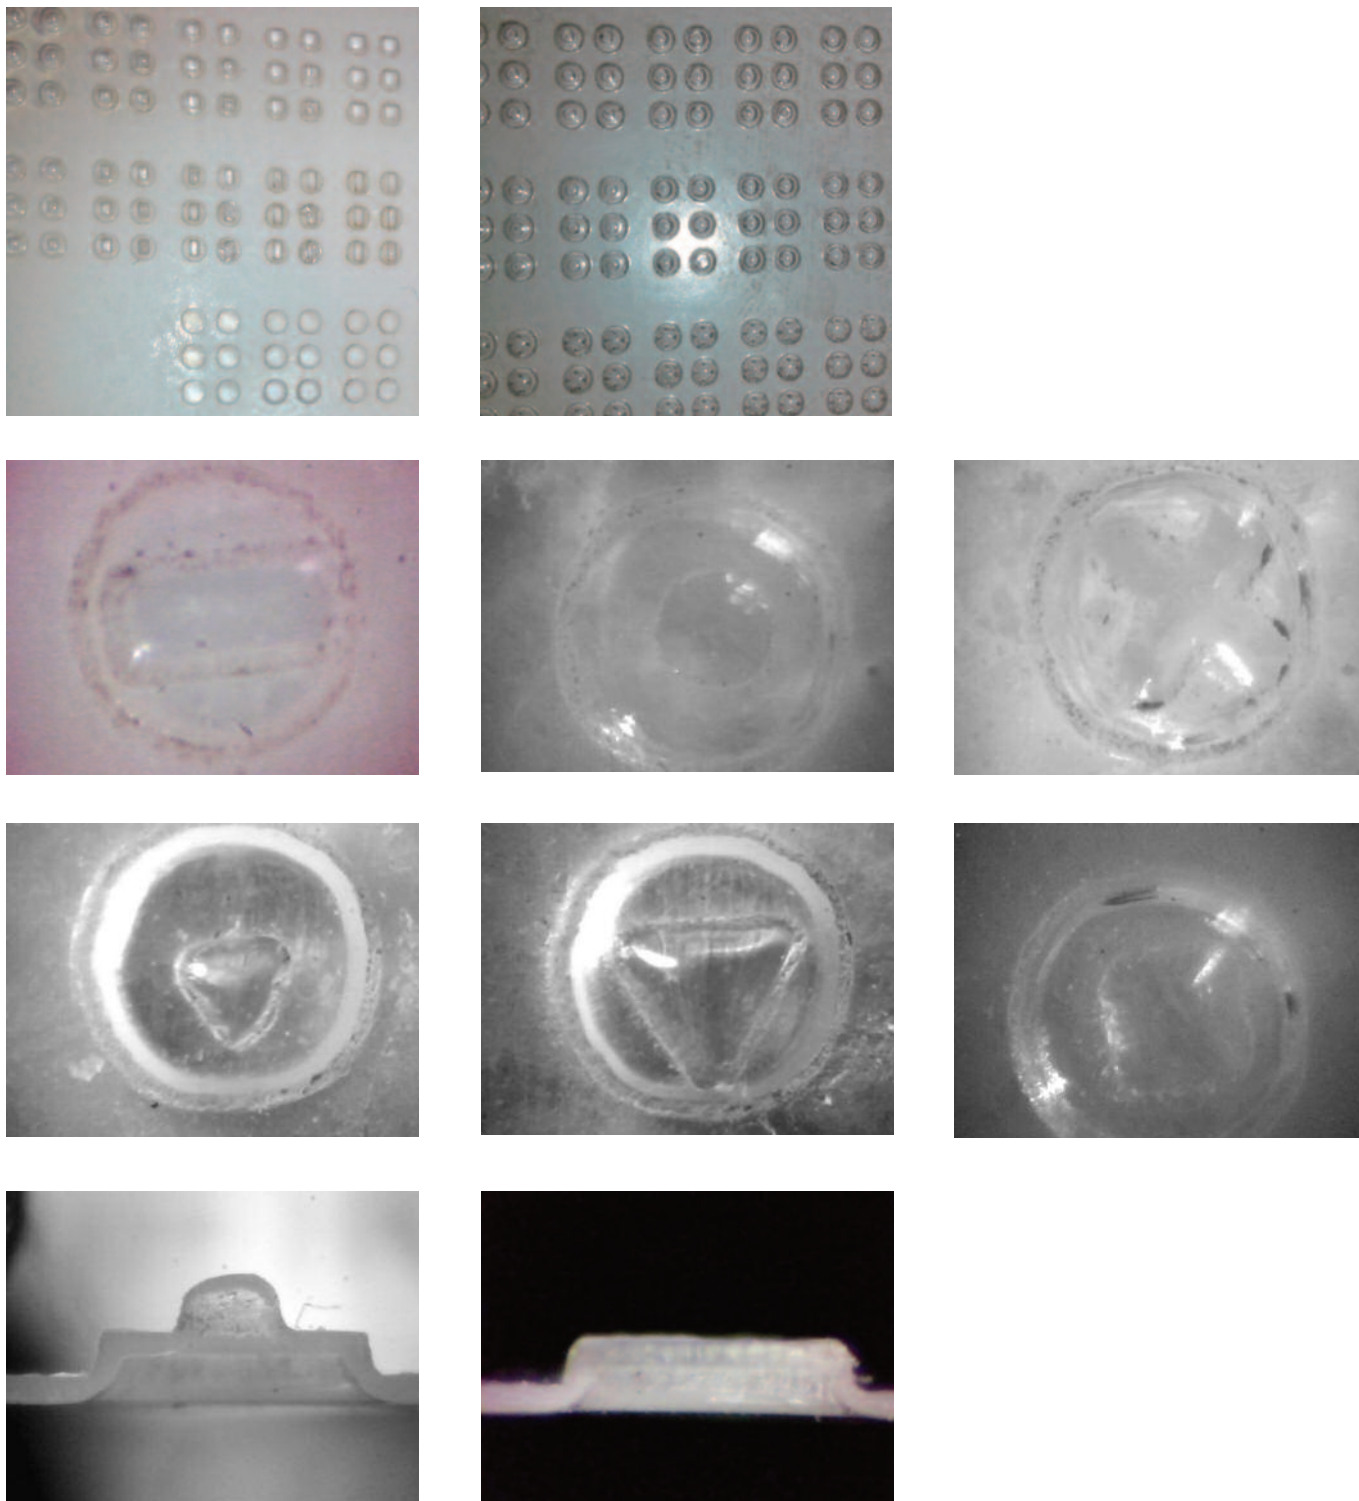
PHOTOS OF VARIOUS VERSIONS OF BRAILLE ELEMENTS: A, B – GENERAL VIEW OF A PART OF A MOULDED PAGE/(A) – USING THE MOULD, FRAGMENT OF WHICH IS SHOWN IN FIG.3.12 (B), (B) - USING THE MOULD, FRAGMENT OF WHICH IS SHOWN IN FIG.3.12 (C); PHOTOS OF BRAILLE FONT ELEMENTS WITH THE TOP IN THE MOULD OF: (C) – RECTANGLES, (D) – CIRCLE, (E) – CROSS, (F,G) – TRIANGLES OF DIFFERENT SIZES, (H) – A SQUARE, AND PHOTOS OF CROSS-SECTIONS: (I) – BRAILLE ELEMENT WITH THE TOP OF “CIRCLE” TYPE (SEE CURRENT FG.), (D) AND (J) - BRAILLE ELEMENT WITH THE TOP OF “CYLINDER” TYPE WITH THE HIEGHT OF 0,25 MM IN CASE WHEN LOWER MATRIX IS “CLOSED” (SEE FIG. 3.12, C, AND CURRENT FIG. B, LOWER ROWS) (OUR OWN WORK)
